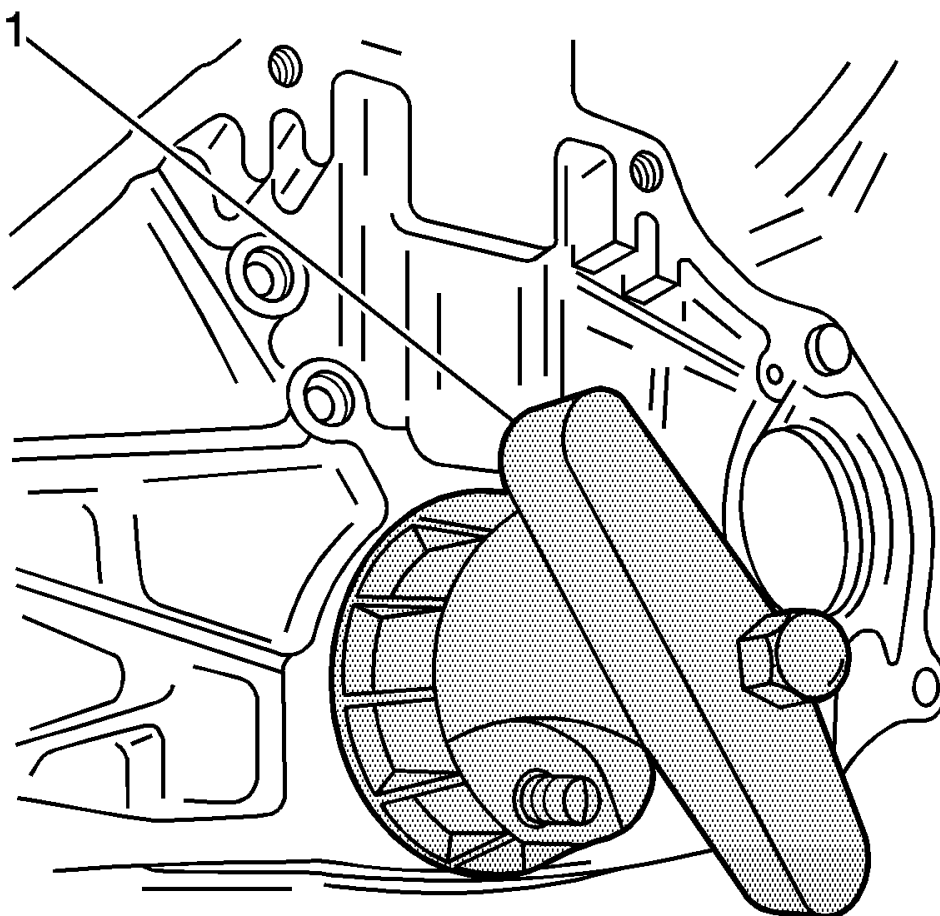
Installing New Crankshaft Rear Oil Seal Using J36972
